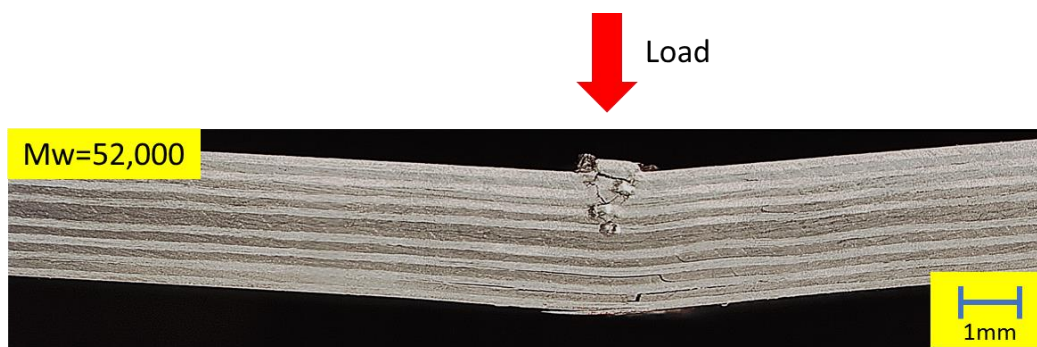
Side view of tape type stitched UD CF/TPEP Bending failure of each Mw.
